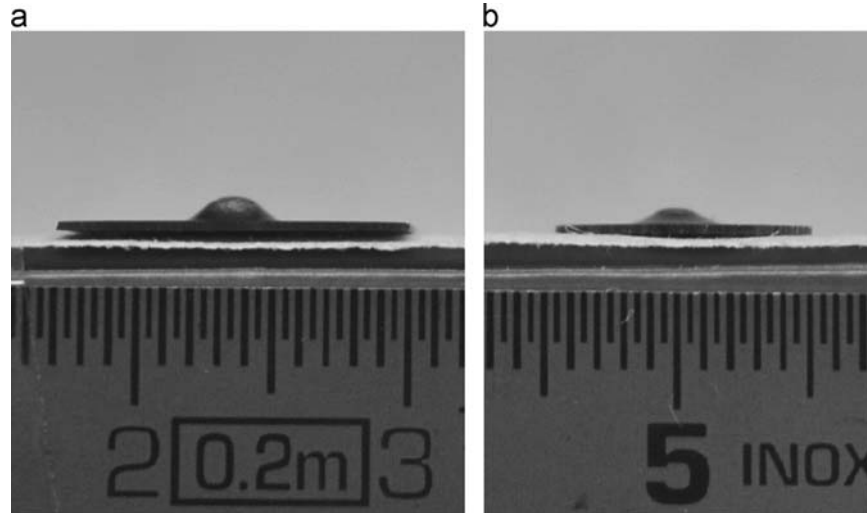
Appearance of specimens after small punch testing of CP Ti: (a) as-received T-specimen and (b) hydrostatically extruded T-specimen.
